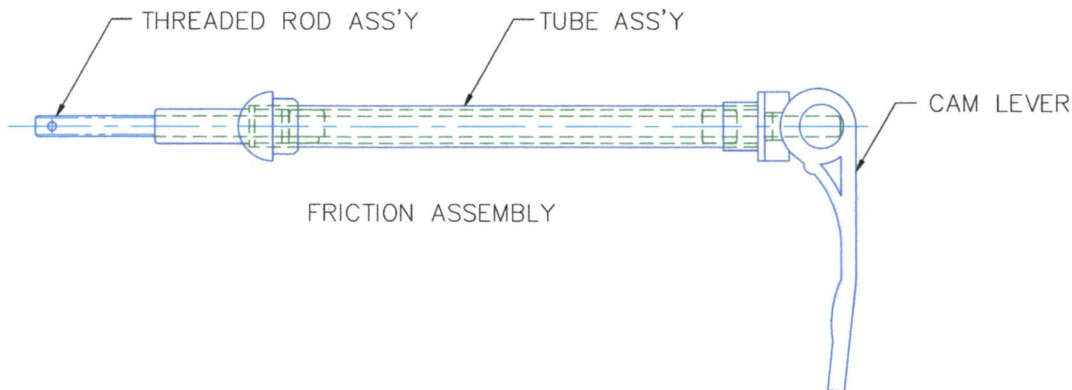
Cyclic Friction Assembly – 95210
